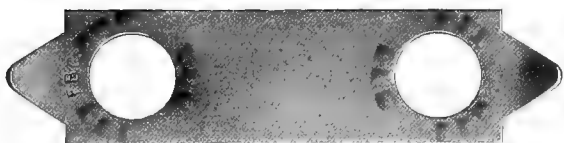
F. B. C. Lock for Striking Plate Bolts.
